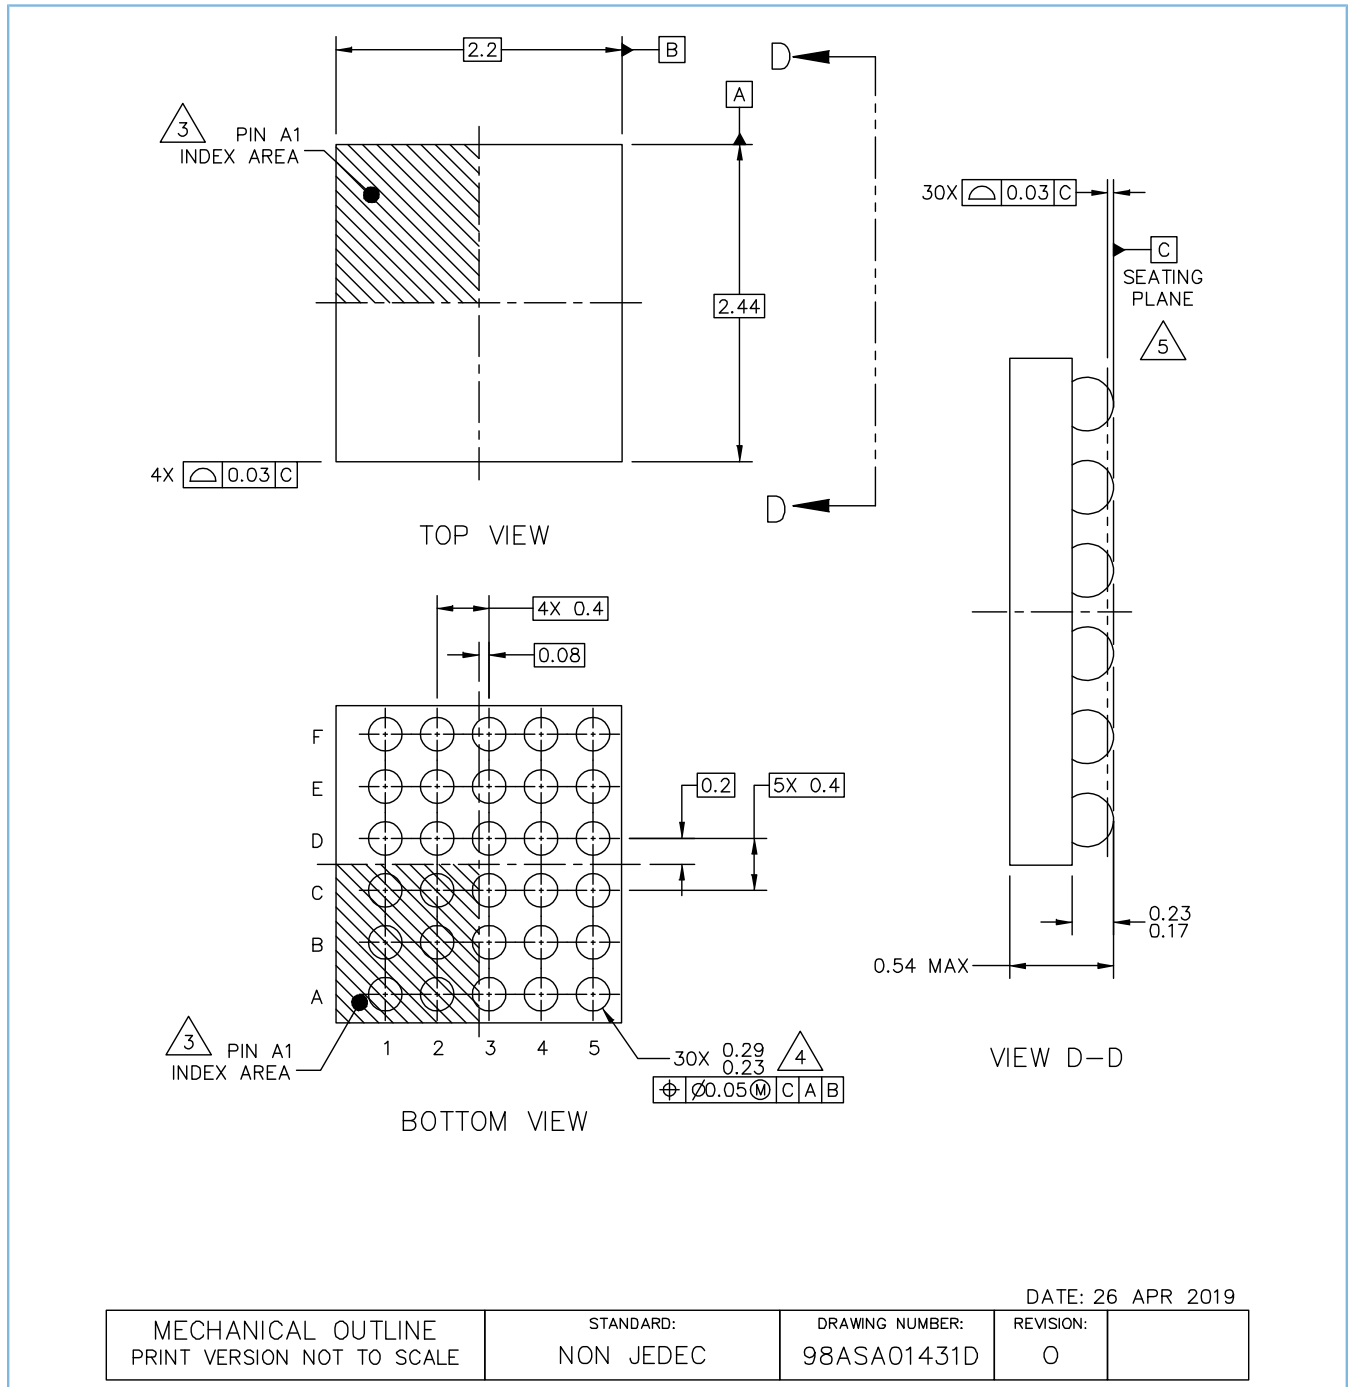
Package outline WLCSP30 (SOT1443-6); with back side coating
